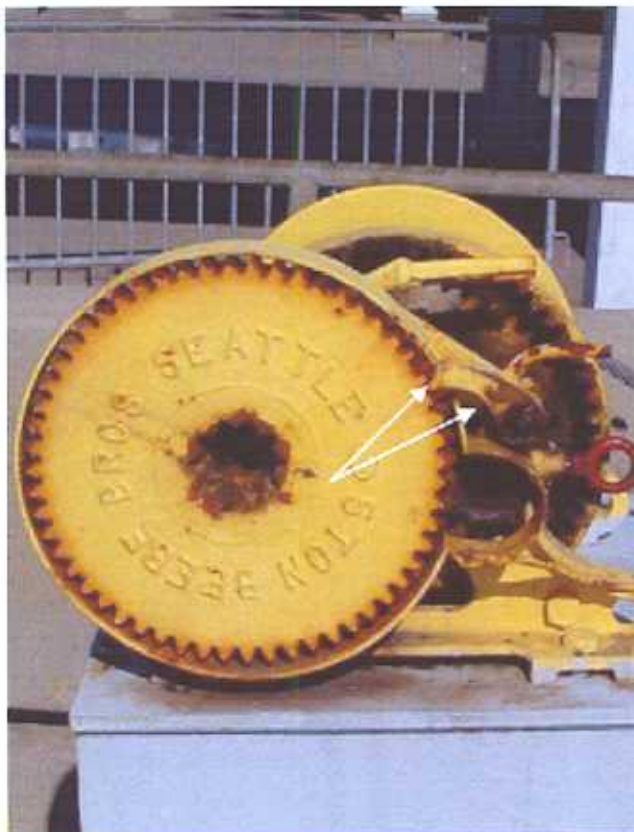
Side view of winch with outer gear shown. Arrows point to the pawl.
